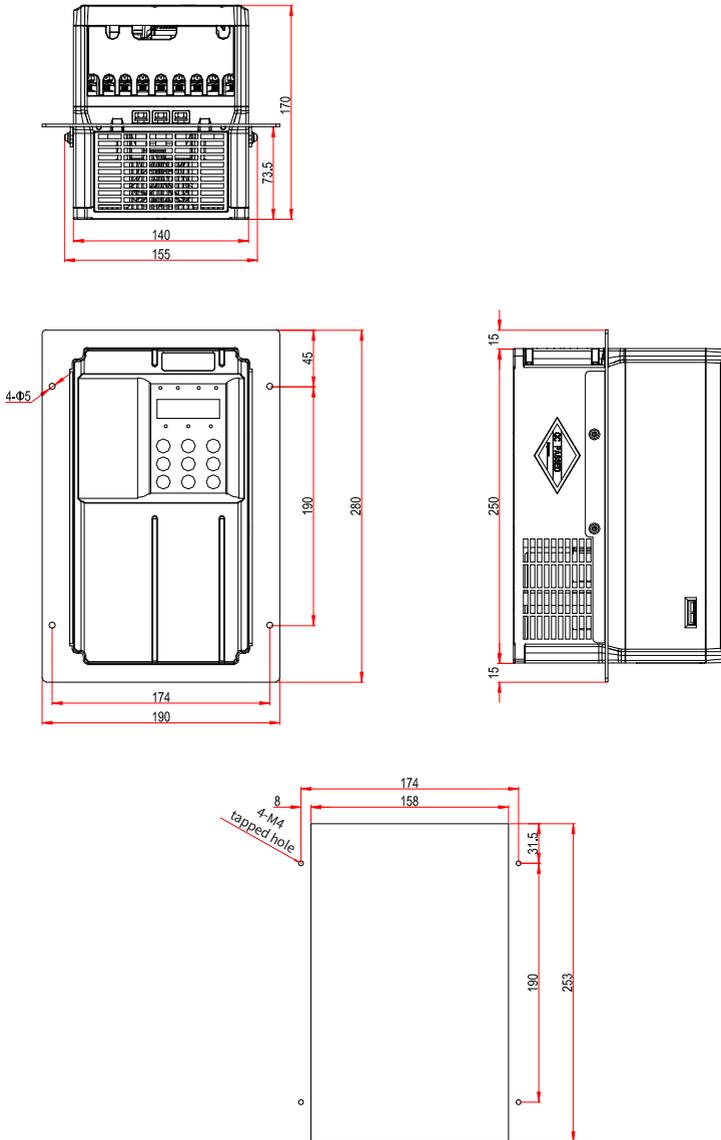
Intermediate mounting bracket dimensions and hole spacing for 7.5-11 kW AC drive models
